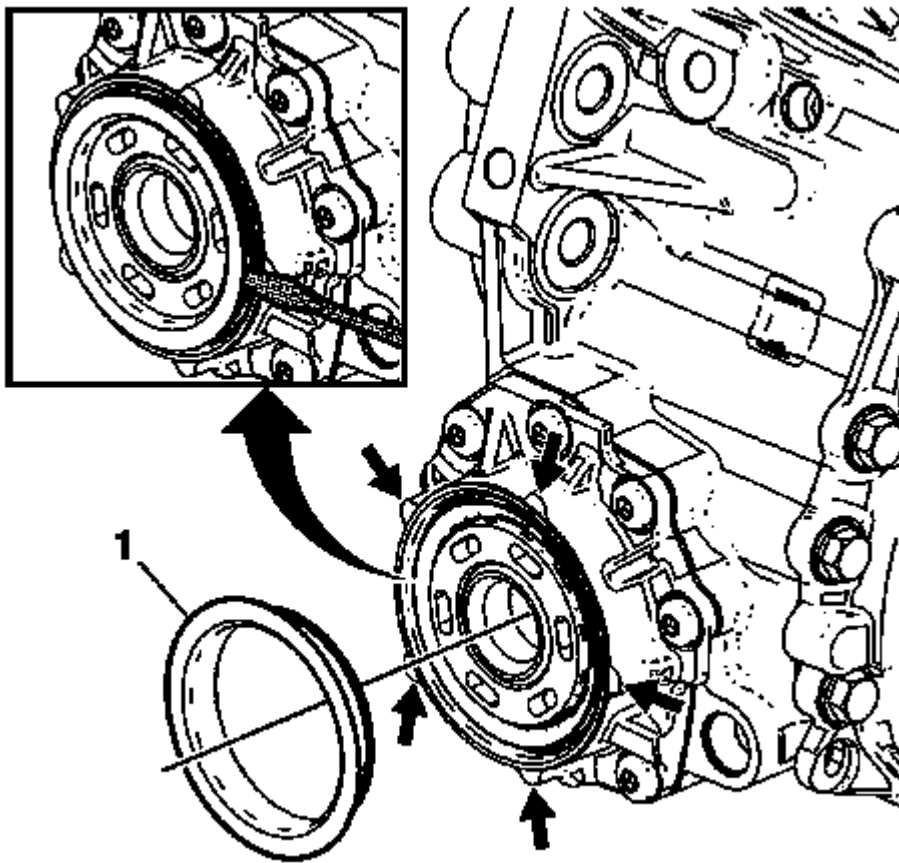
View Of Rear Output Shaft Seal Sleeve
